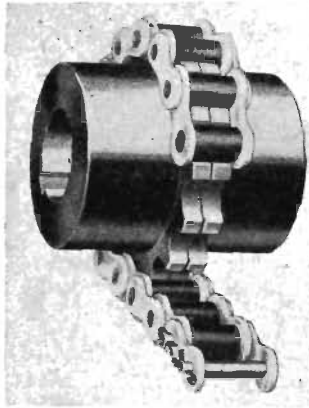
Flexible coupling using roller chain to connect the coupling halves.
